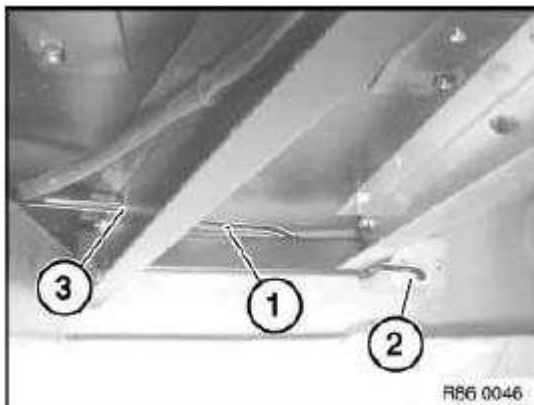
Identifying Cable, Housing & Drawbar Member Aperture
